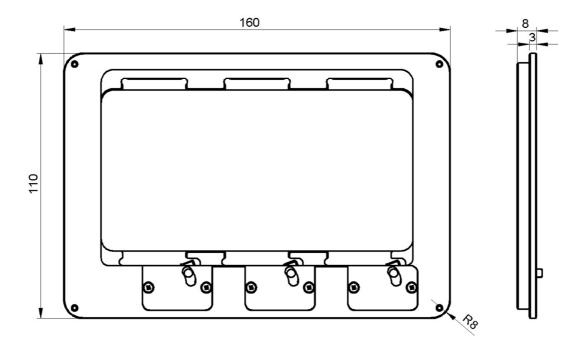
Outer dimensions of the sample plate, e.g. slide holder triple, LMT accessories
